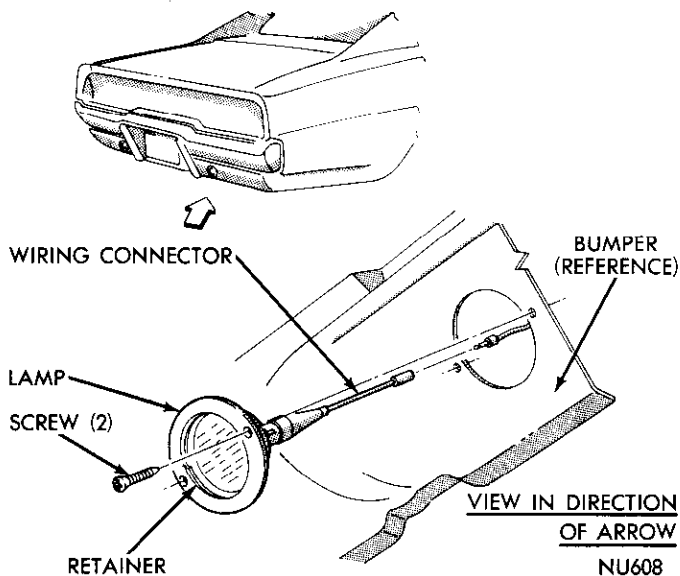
Lower Deck Panel Back-Up Lamp—Coronet
